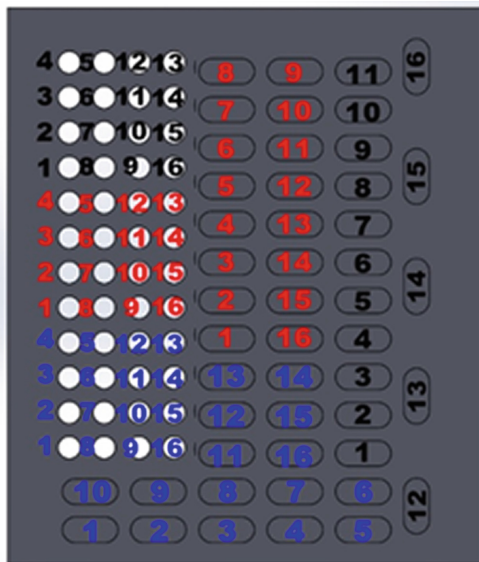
Tool path strategy for each processed hole and slot (Blue-Helical, Red-Zig-Zag, Black-iMachining)
